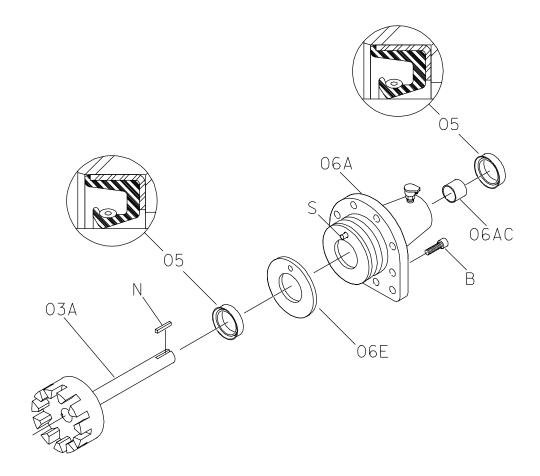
Standard Lip And Optional 65A And 65C Seal
